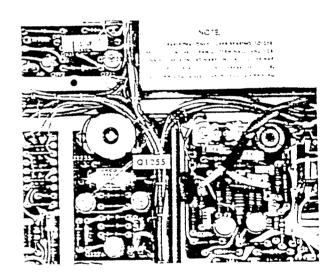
Location of Q1255 (Calibrator section of A Sweep board).
